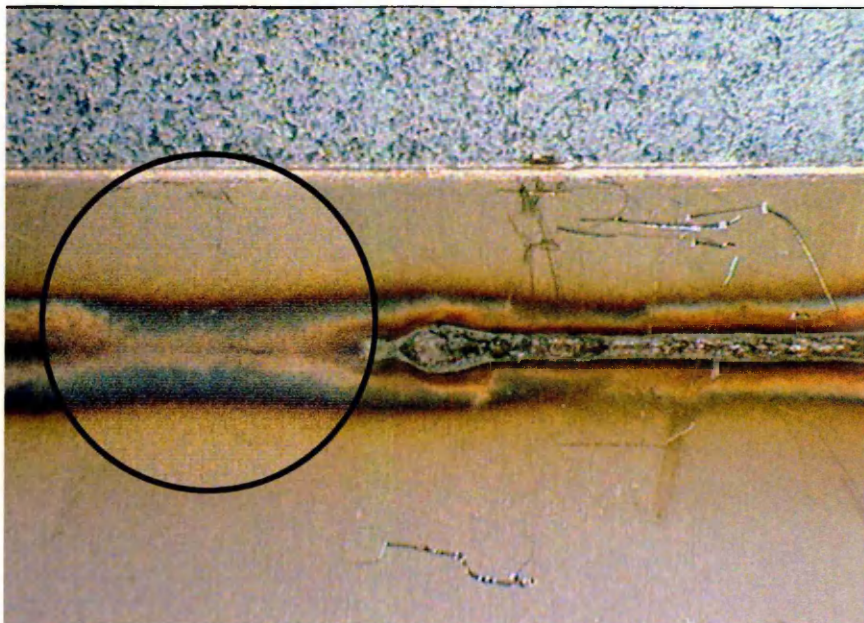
Weld bead penetration breakdown in a 1.2mm V1437 (top) – 1mm 304 laser welded lap joint
